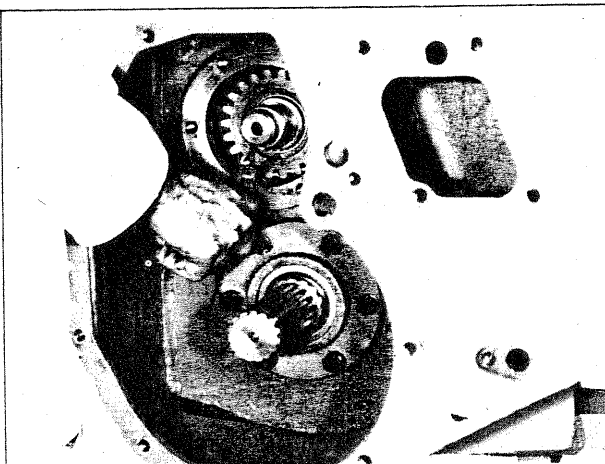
REMOVAL AND DISASSEMBLY OF BEVEL GEAR SHAFT ASSEMBLY (Sheet 1 of 3)
